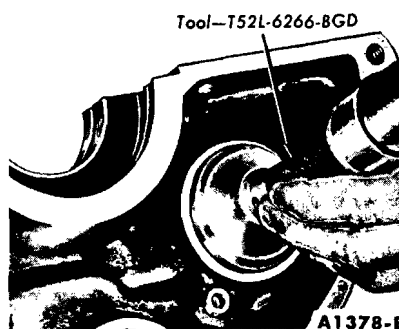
Camshaft Rear Bearing Bore Plug Installation
